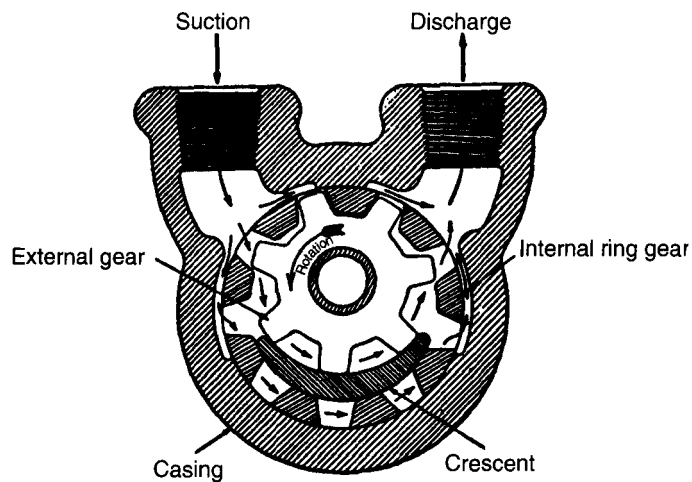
Internal gear pump. Courtesy Tuthill Pump Group.
